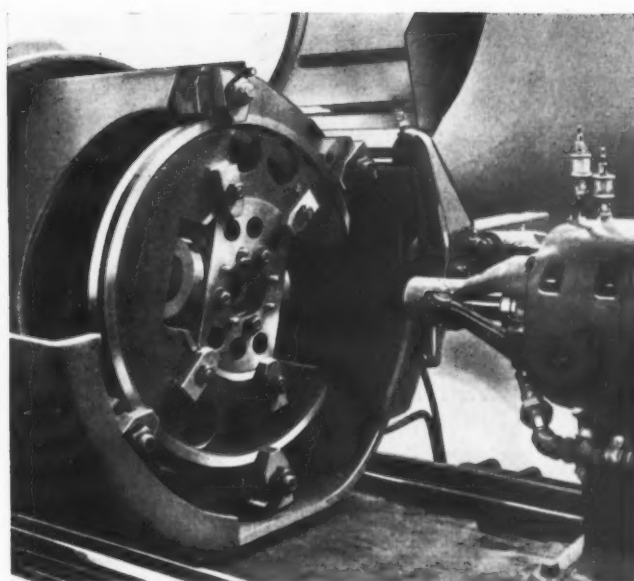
Small Valve Bodies Require a Sub-adapter Plate which is Attached to an Auxiliary Plate that is Accurately Located on and Clamped to the Work Fixture
